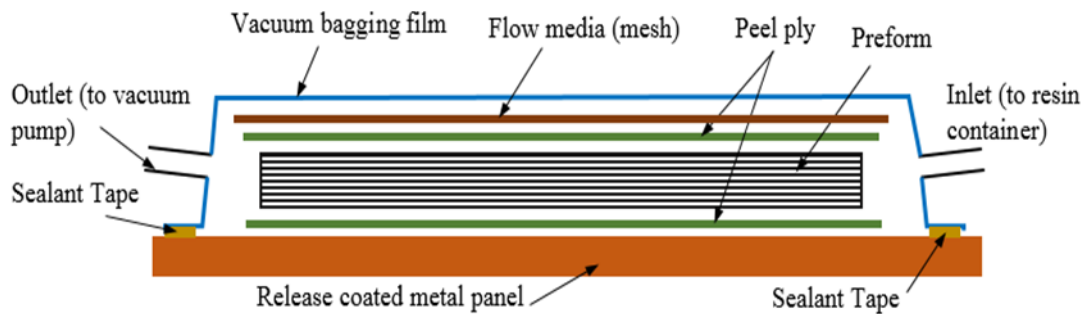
Vacuum infusion moulding showing the vacuum bag, sealant, outlet to vacuum pump, inlet to resin supply and the preform surrounded by peel ply
